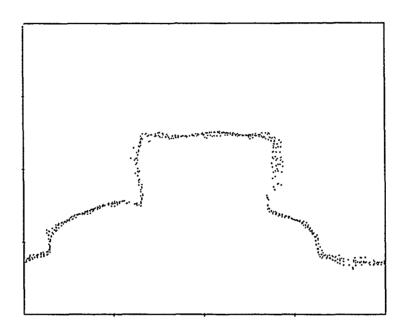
Cross-Section of Flatpack Joints (Insufficient Solder)
